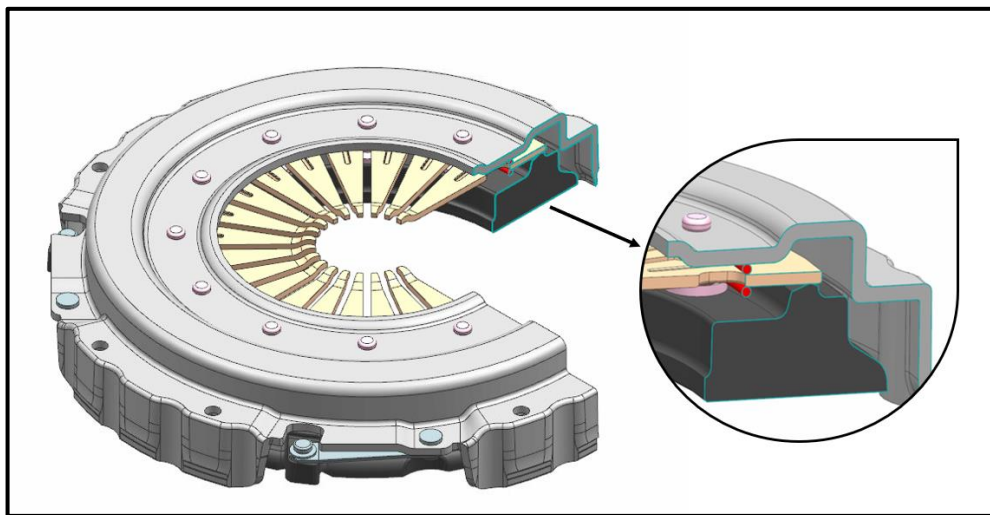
The pushed-type clutch cover assembly mechanism.
